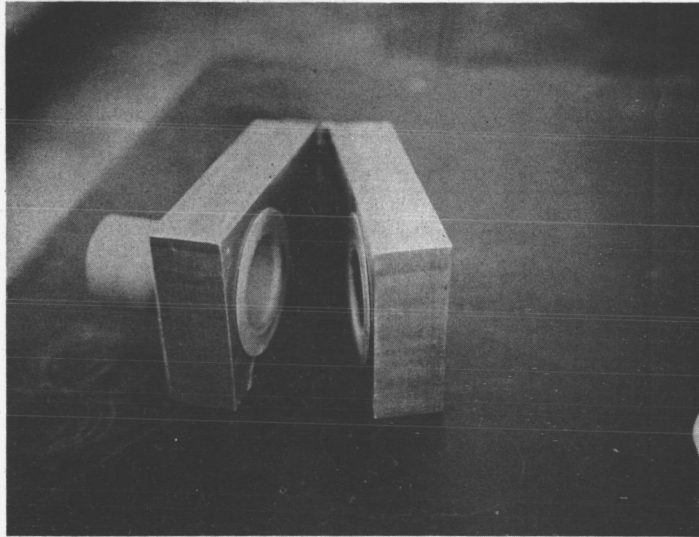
Flange-type Connection Mounted Between Buffer Plates. Explosive Sheet is Detonated on Top of One of the Plates.
